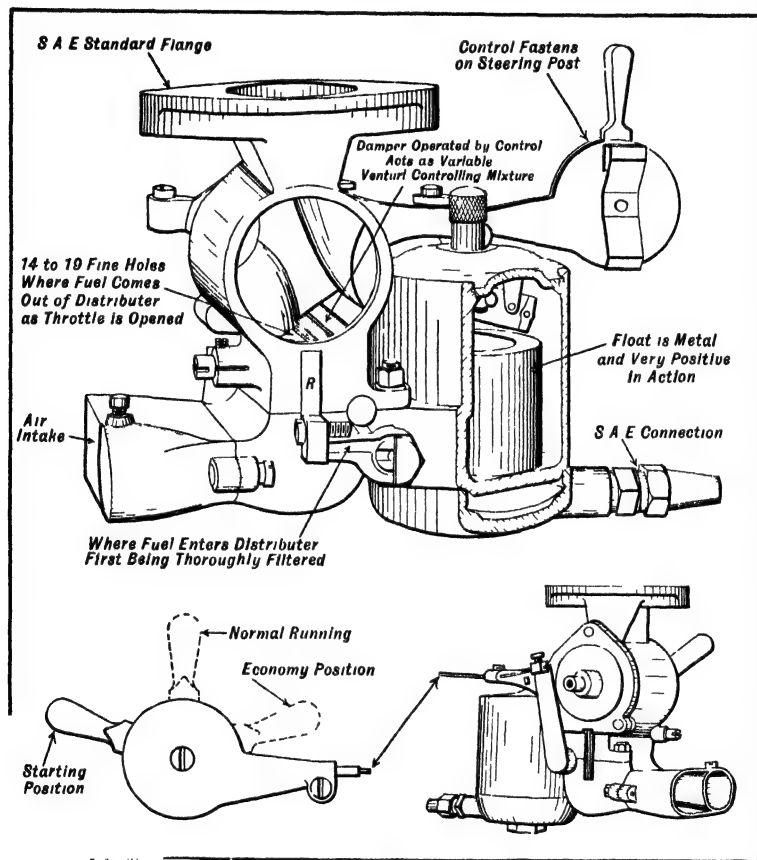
Sectional View Showing Construction of the Master Carburetor, a Multiple Nozzle Form Used on Racing Car Engines and Some Early Aviation Engines.
